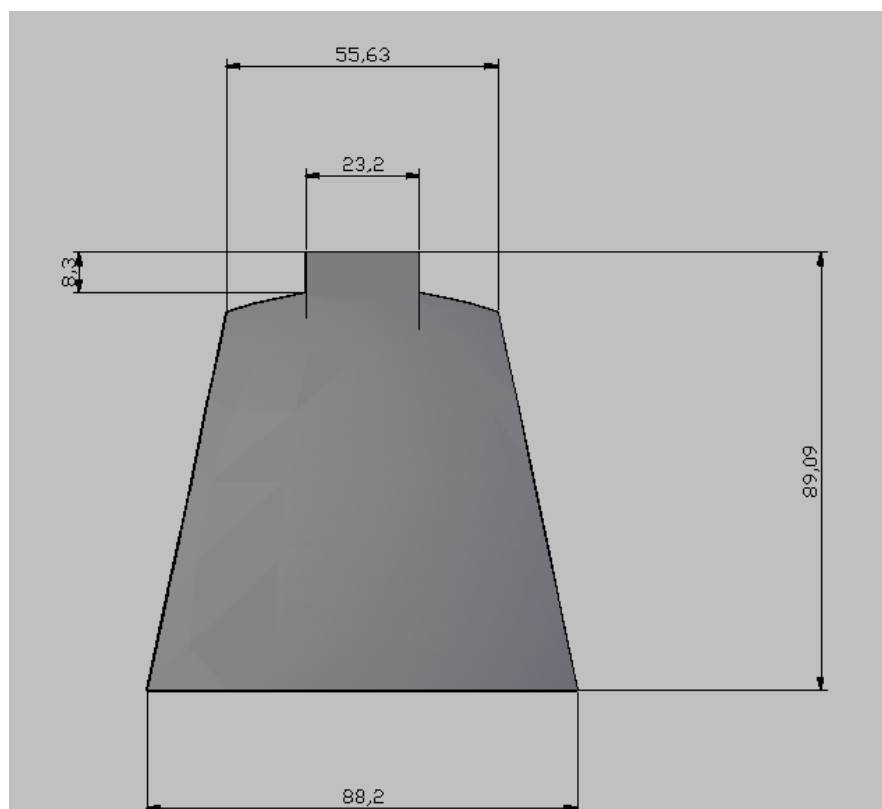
Front view dimensions of the centre part of the safety helmet
